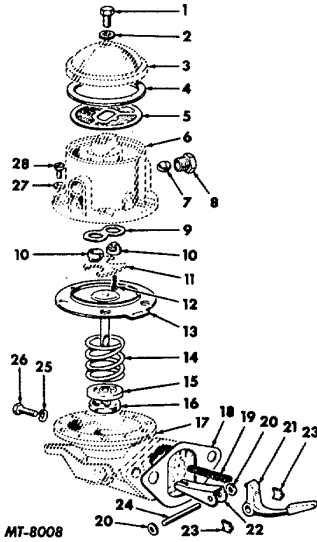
Exploded View Screen Filter Type Fuel Pump
